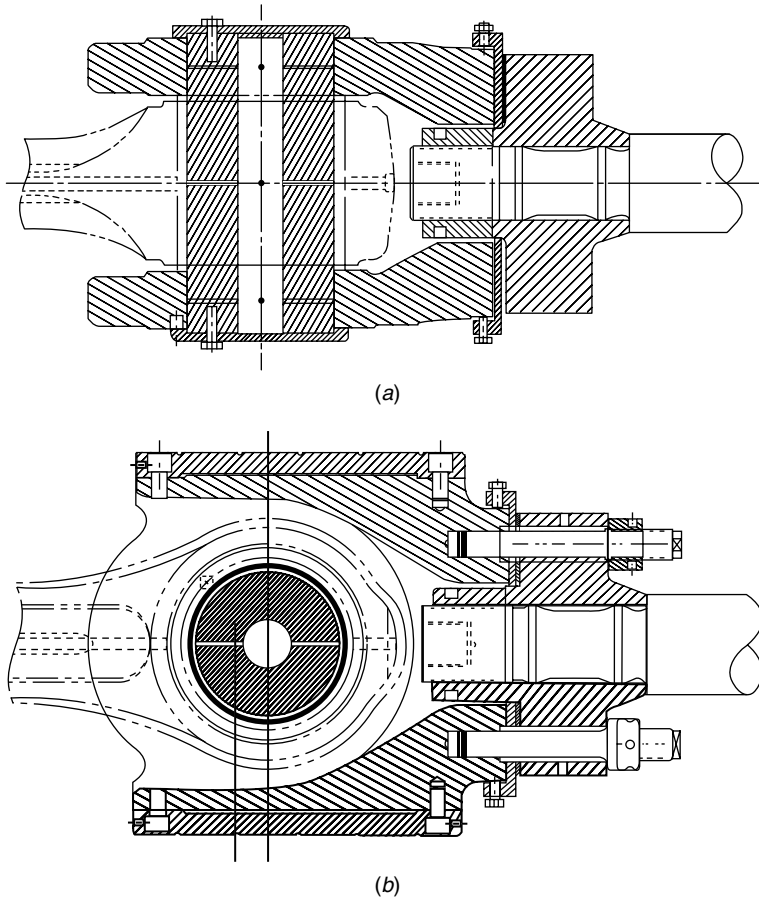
Flanged crosshead: (a) plan view; (b) front view.
